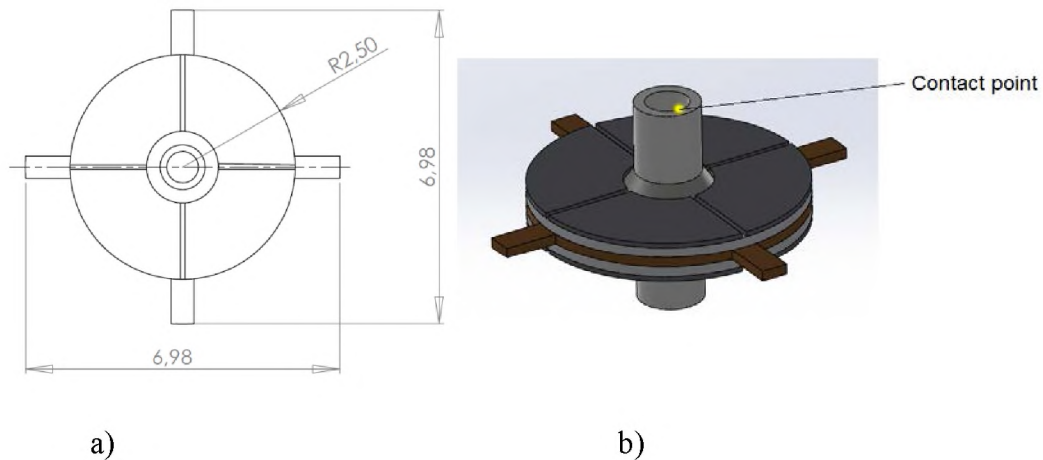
The principal scheme of the actuator: a) dimensions; b) 3D view
